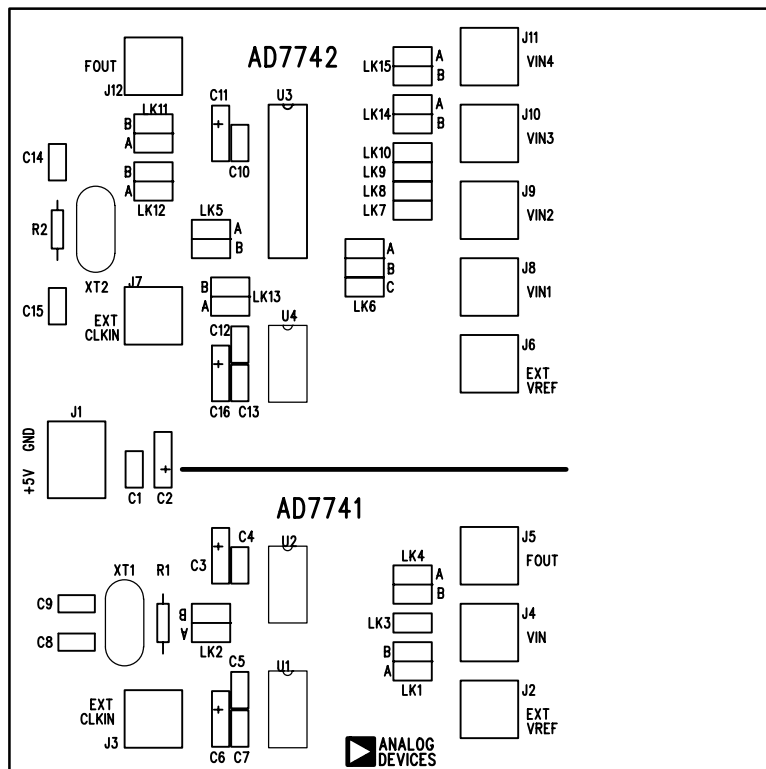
AD7741/42 Evaluation Board Component Placement Drawing.
